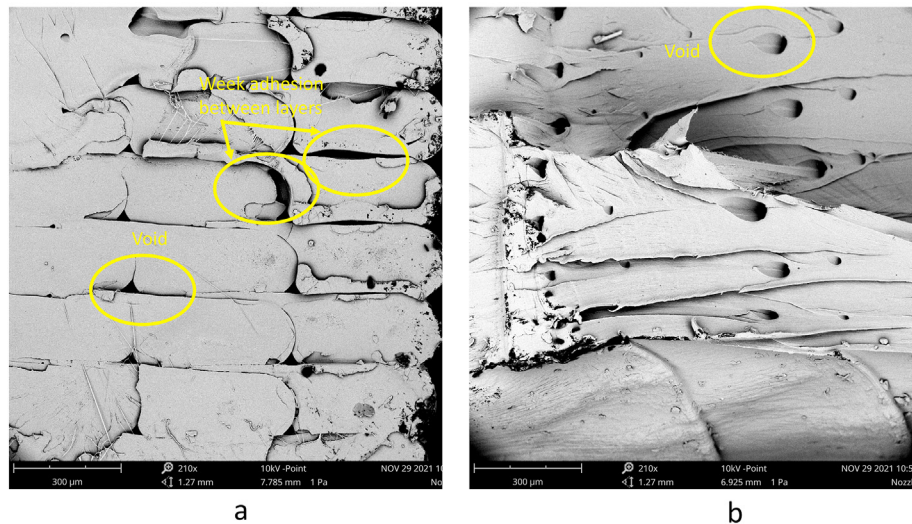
SEM images revealing adhesion between layers in FDM parts printed with (a) 0.4 mm nozzle (b) 0.6 mm nozzle.
